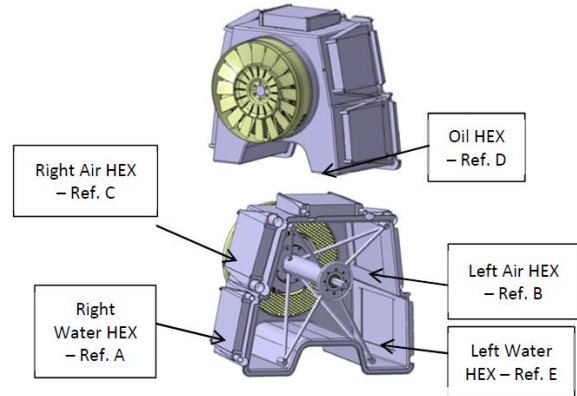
Bench tested cooling box prototype (plexiglass transparent wall opposite the fan)
